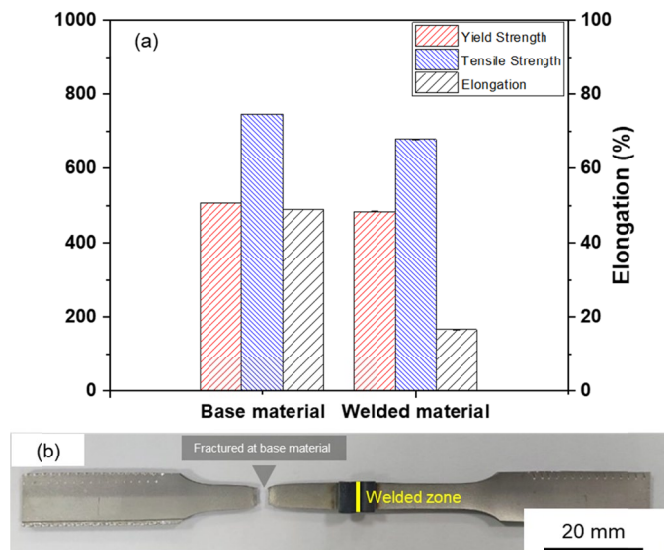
(a) Tensile properties and (b) top view of tensile tested welds
